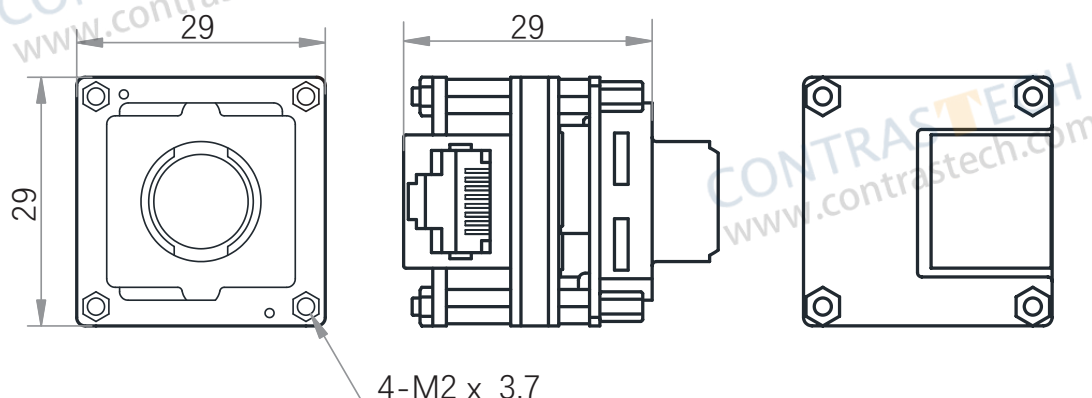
Mechanical Dimensions (in mm) of the M12-mount RJ45 interface Cameras with 29 * 29 * 29 mm.
